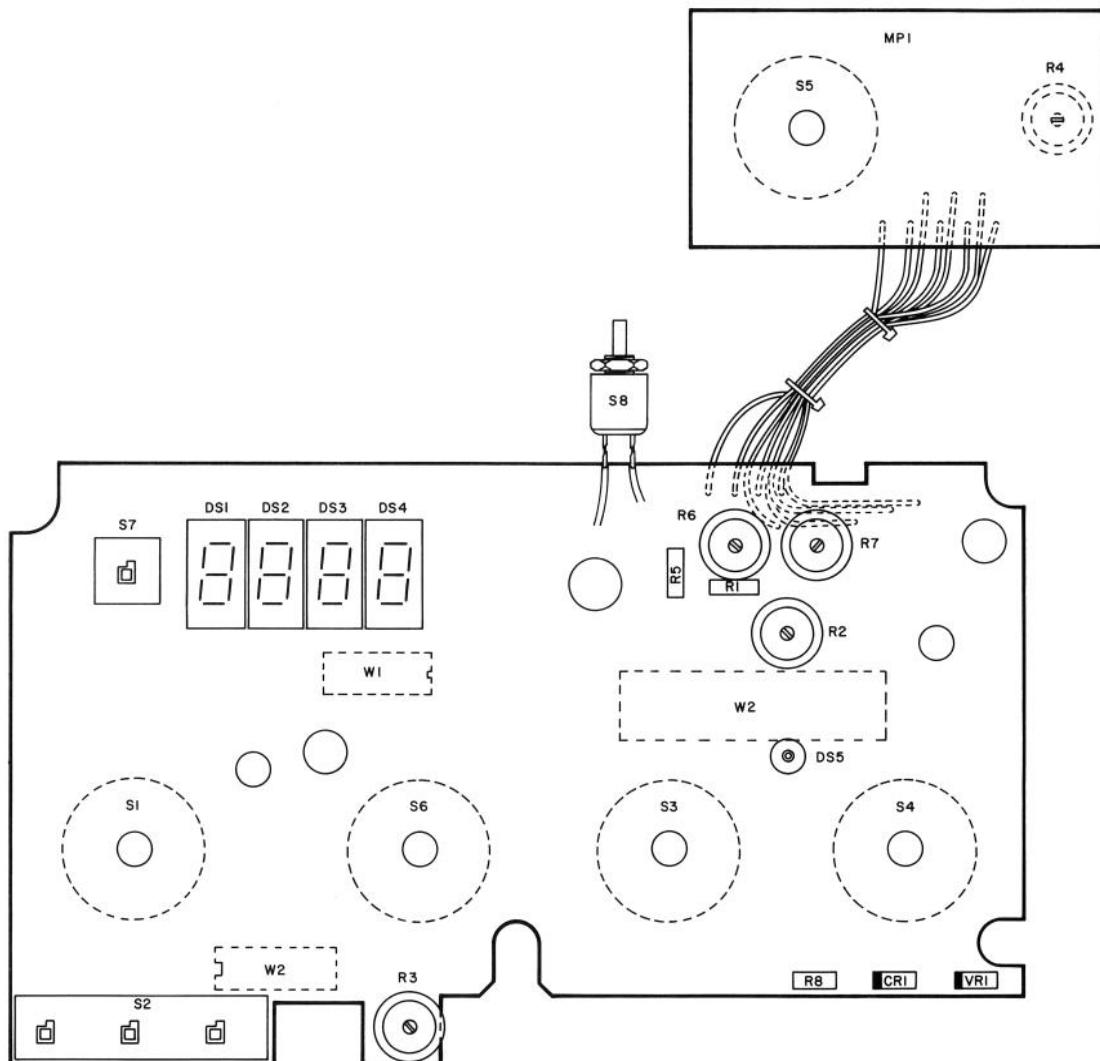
FRONT SWITCH BOARD ASSEMBLY A2A1, COMPONENT LOCATIONS
